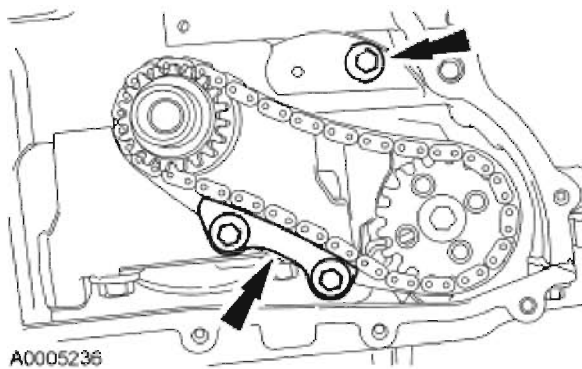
Locating Crankshaft Sprocket Flange
